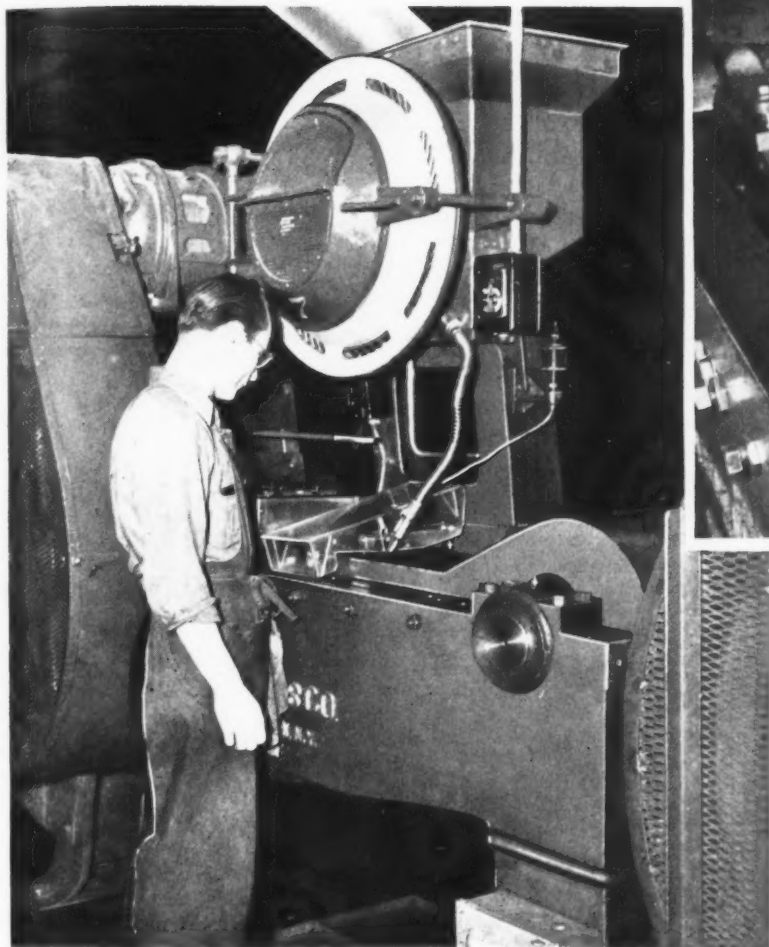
Close-up View of One of the Base-end "Bumping" Machines, Showing the Injecting Stem Advancing to Push a Cartridge Case into the Die
